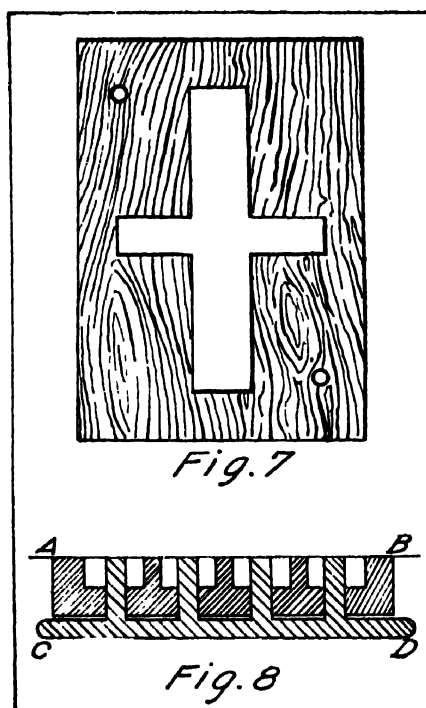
HALF SECTION OF CORE BOX FOR TROLLEY WHEELS AS IT CAME FROM THE CUSTOMER FIG. 8—SECTION OF GANG CORE BOX FOR MAKING THE DISK CORE FOR THE CHAMBER IN THE TROLLEY WHEEL
